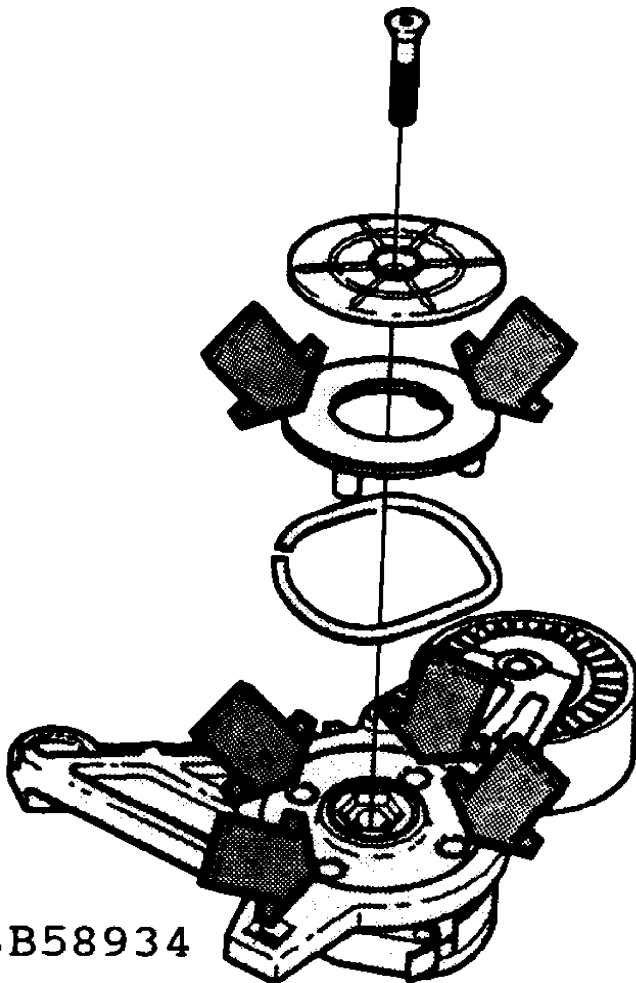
Auxiliary Drive Belt Tensioner Lubrication Points
